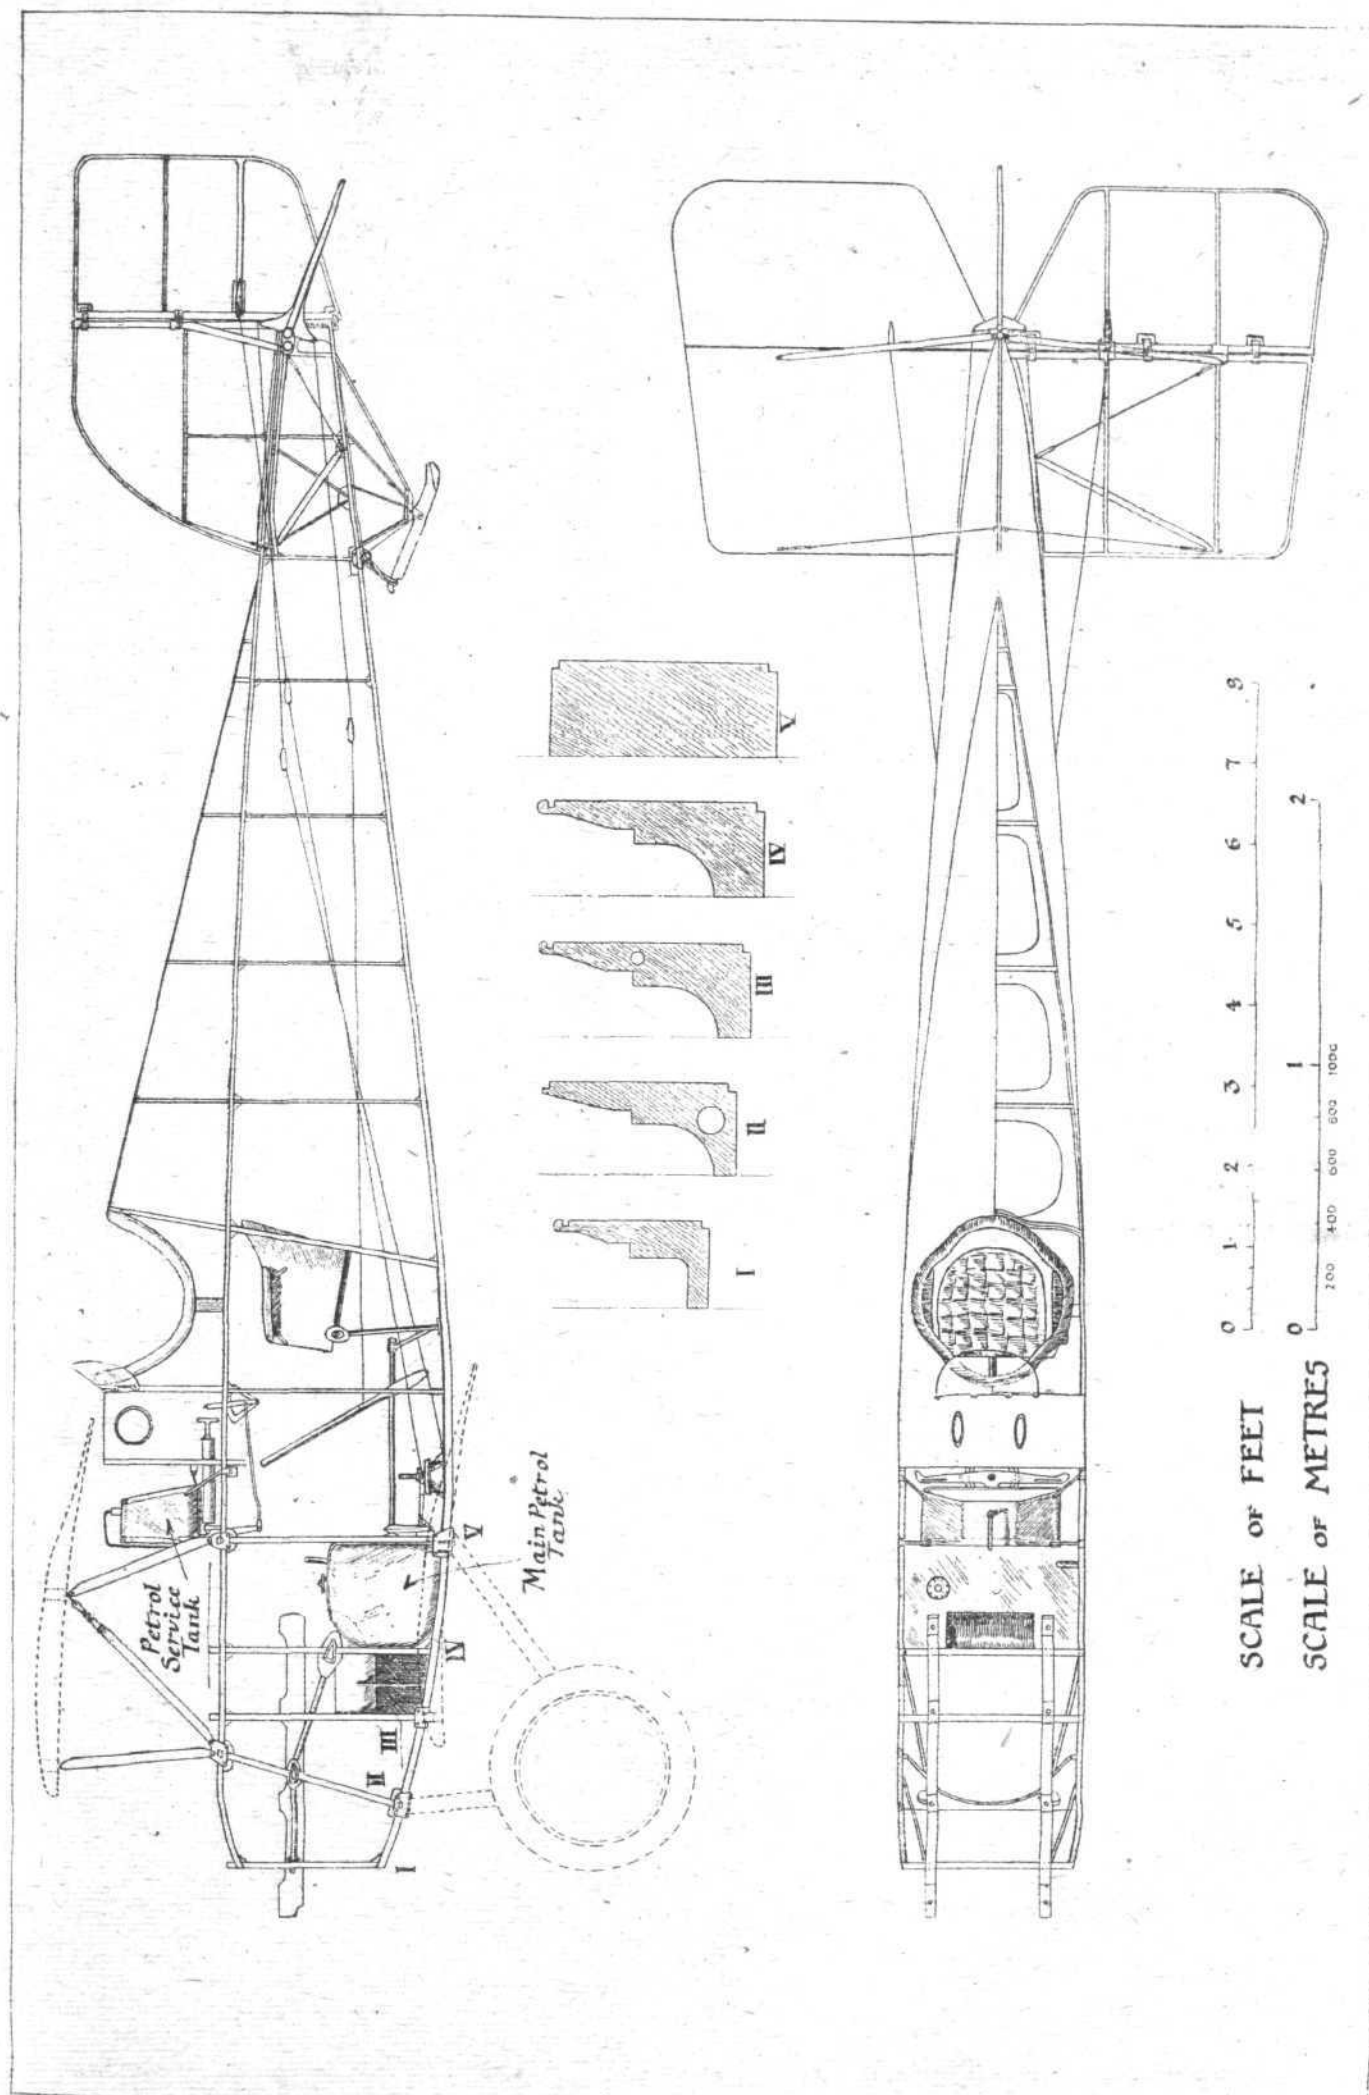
Side elevation and plan, to scale, of the body of the Berg single-seater.
